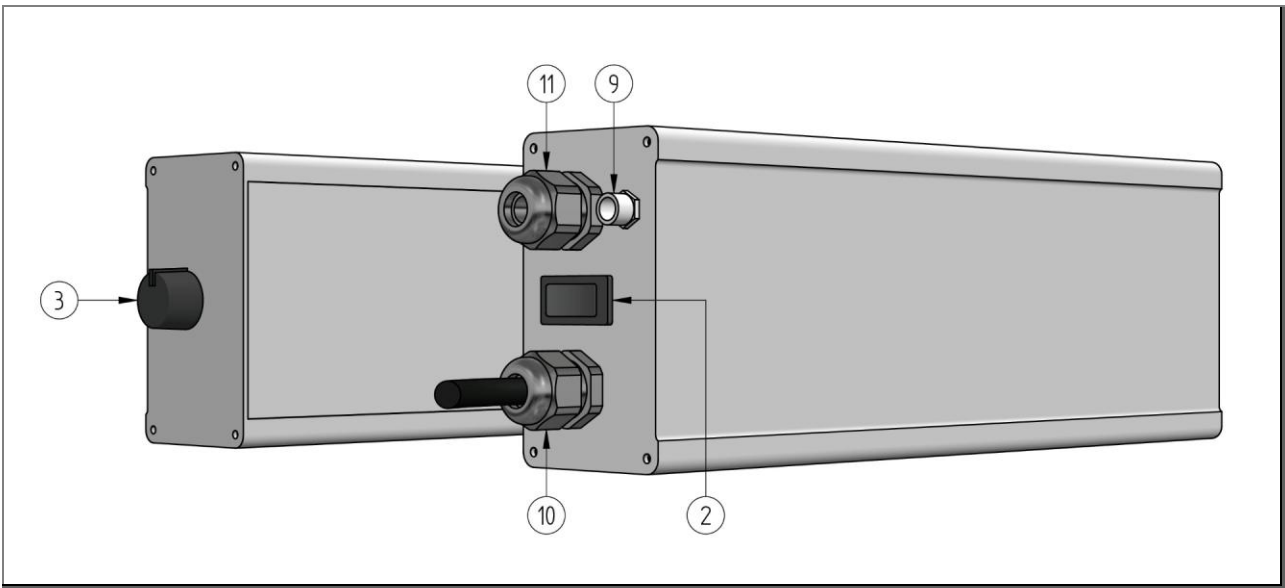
Control unit (left inlet side front view, right outlet side rear view)
